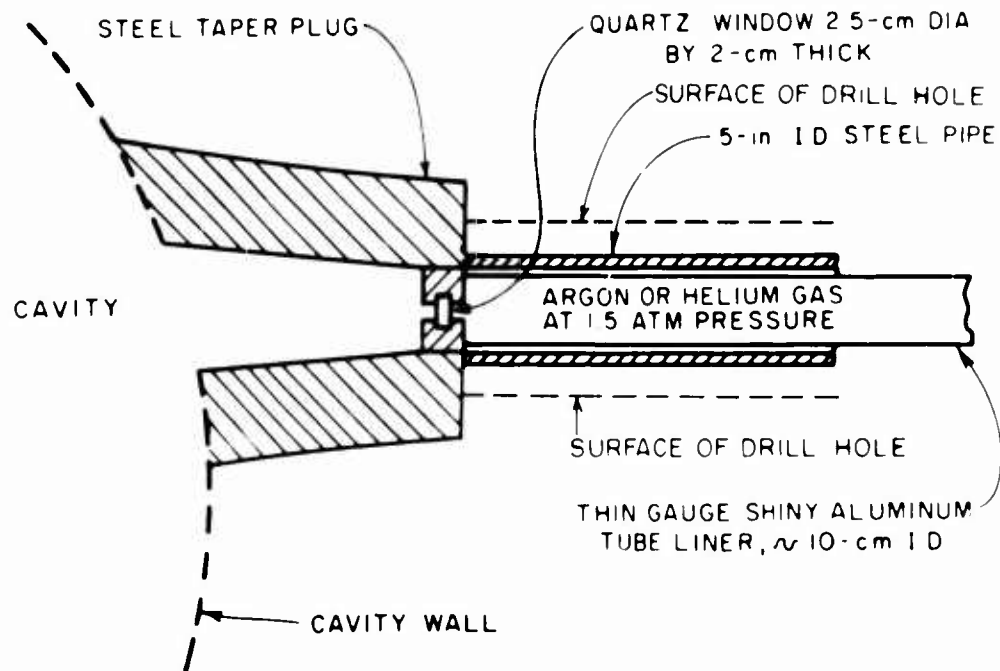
DETAILS OF PROPOSED JUNCTION OF LIGHT PIPE AT CAVITY WALL
